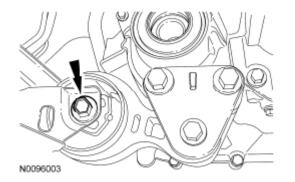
Locating Engine Roll Restrictor Bolt Courtesy of FORD MOTOR CO.
